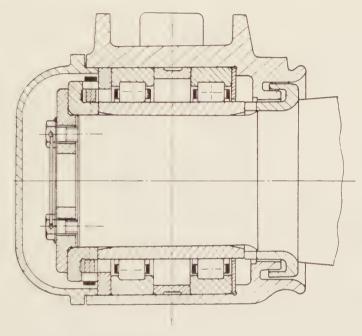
Hoffmann axlebox with supporting bearing using cylindrical rollers equivalent to the PKP boxes.
